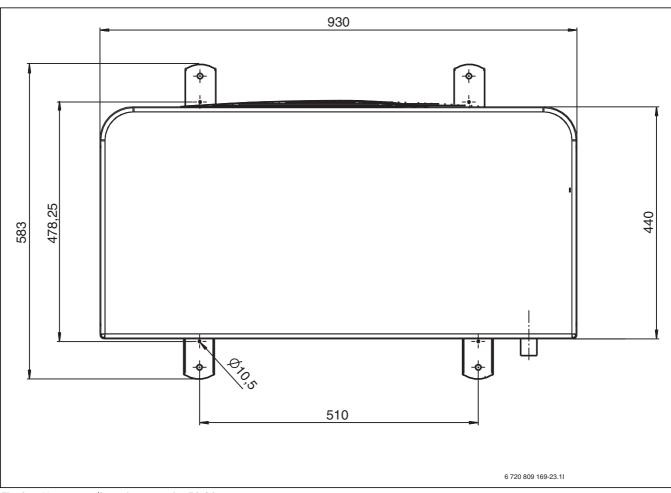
Heat pump dimensions and connections, rear size 50-90
